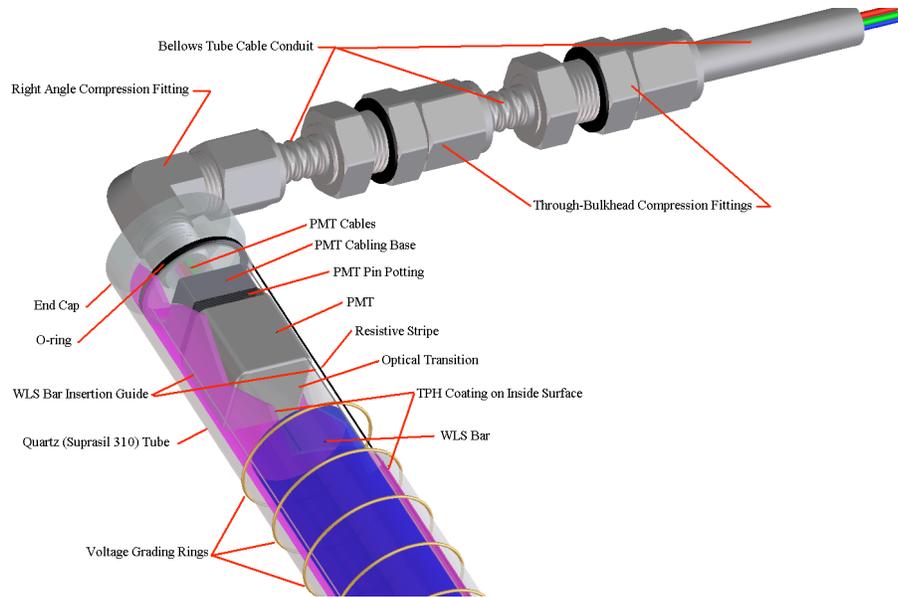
Cutaway view of the PMT end of the QT WLS assembly, showing details of the proposed design concept.
